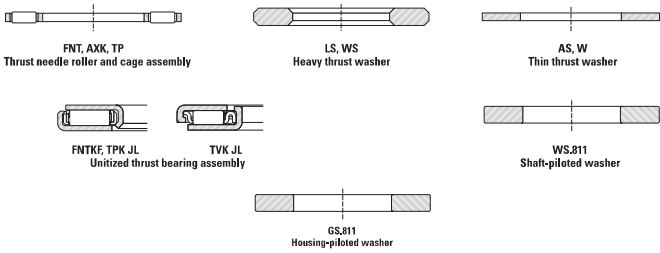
Types of metric series thrust needle roller and cage assemblies and thrust washers
